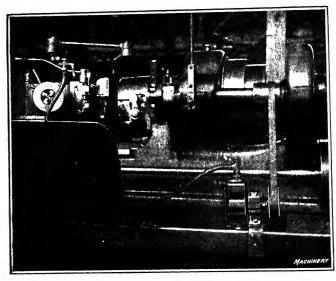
Geared Pump in Use, showing Method of mounting, driving and delivering Coolant to Work
